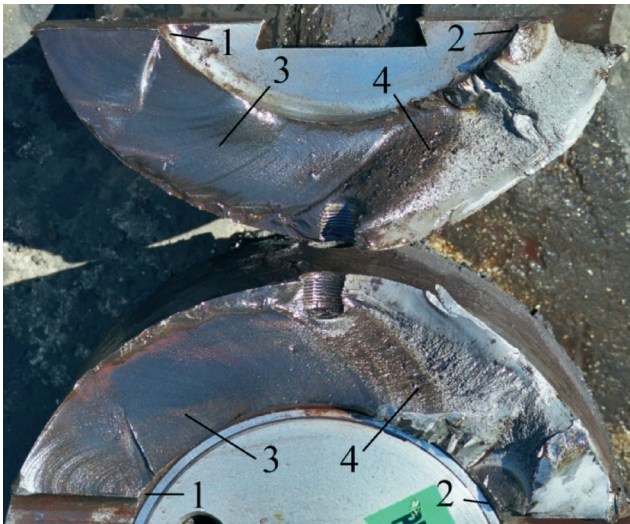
Fracture surface of 1<sup>st</sup> coupling
